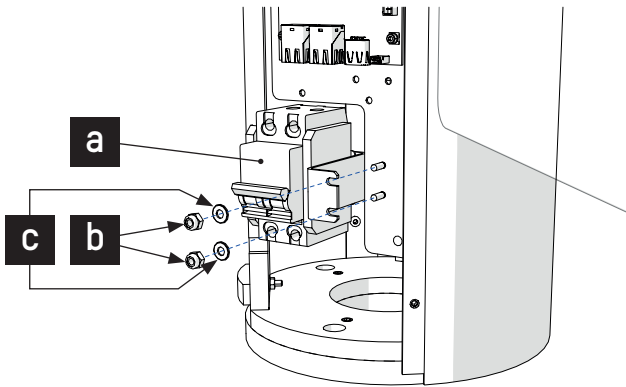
Coupling replacement (Circuit breaker assembly)
